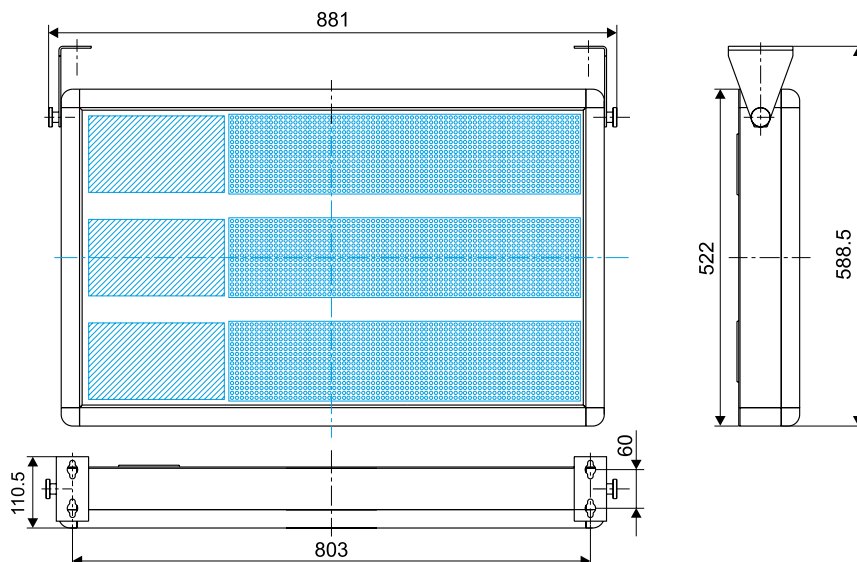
Overall dimensions of the panel and layout of holes and suspension clamps.
